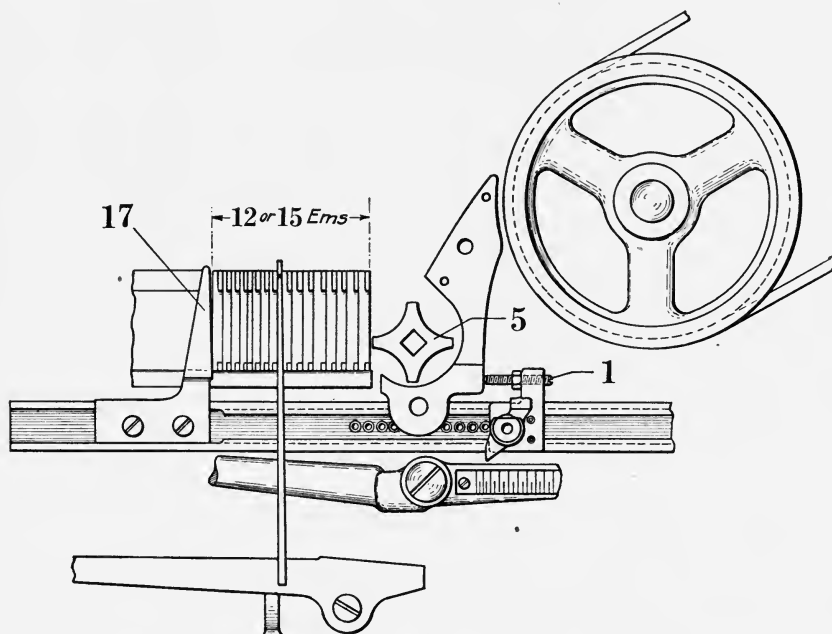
First Style Assembler Slide. Means of adjusting the em measure by the screw 1, so the space between the assembler star 5 and the slide finger 17 will be approximately .014" less than the space between the vise jaws.
